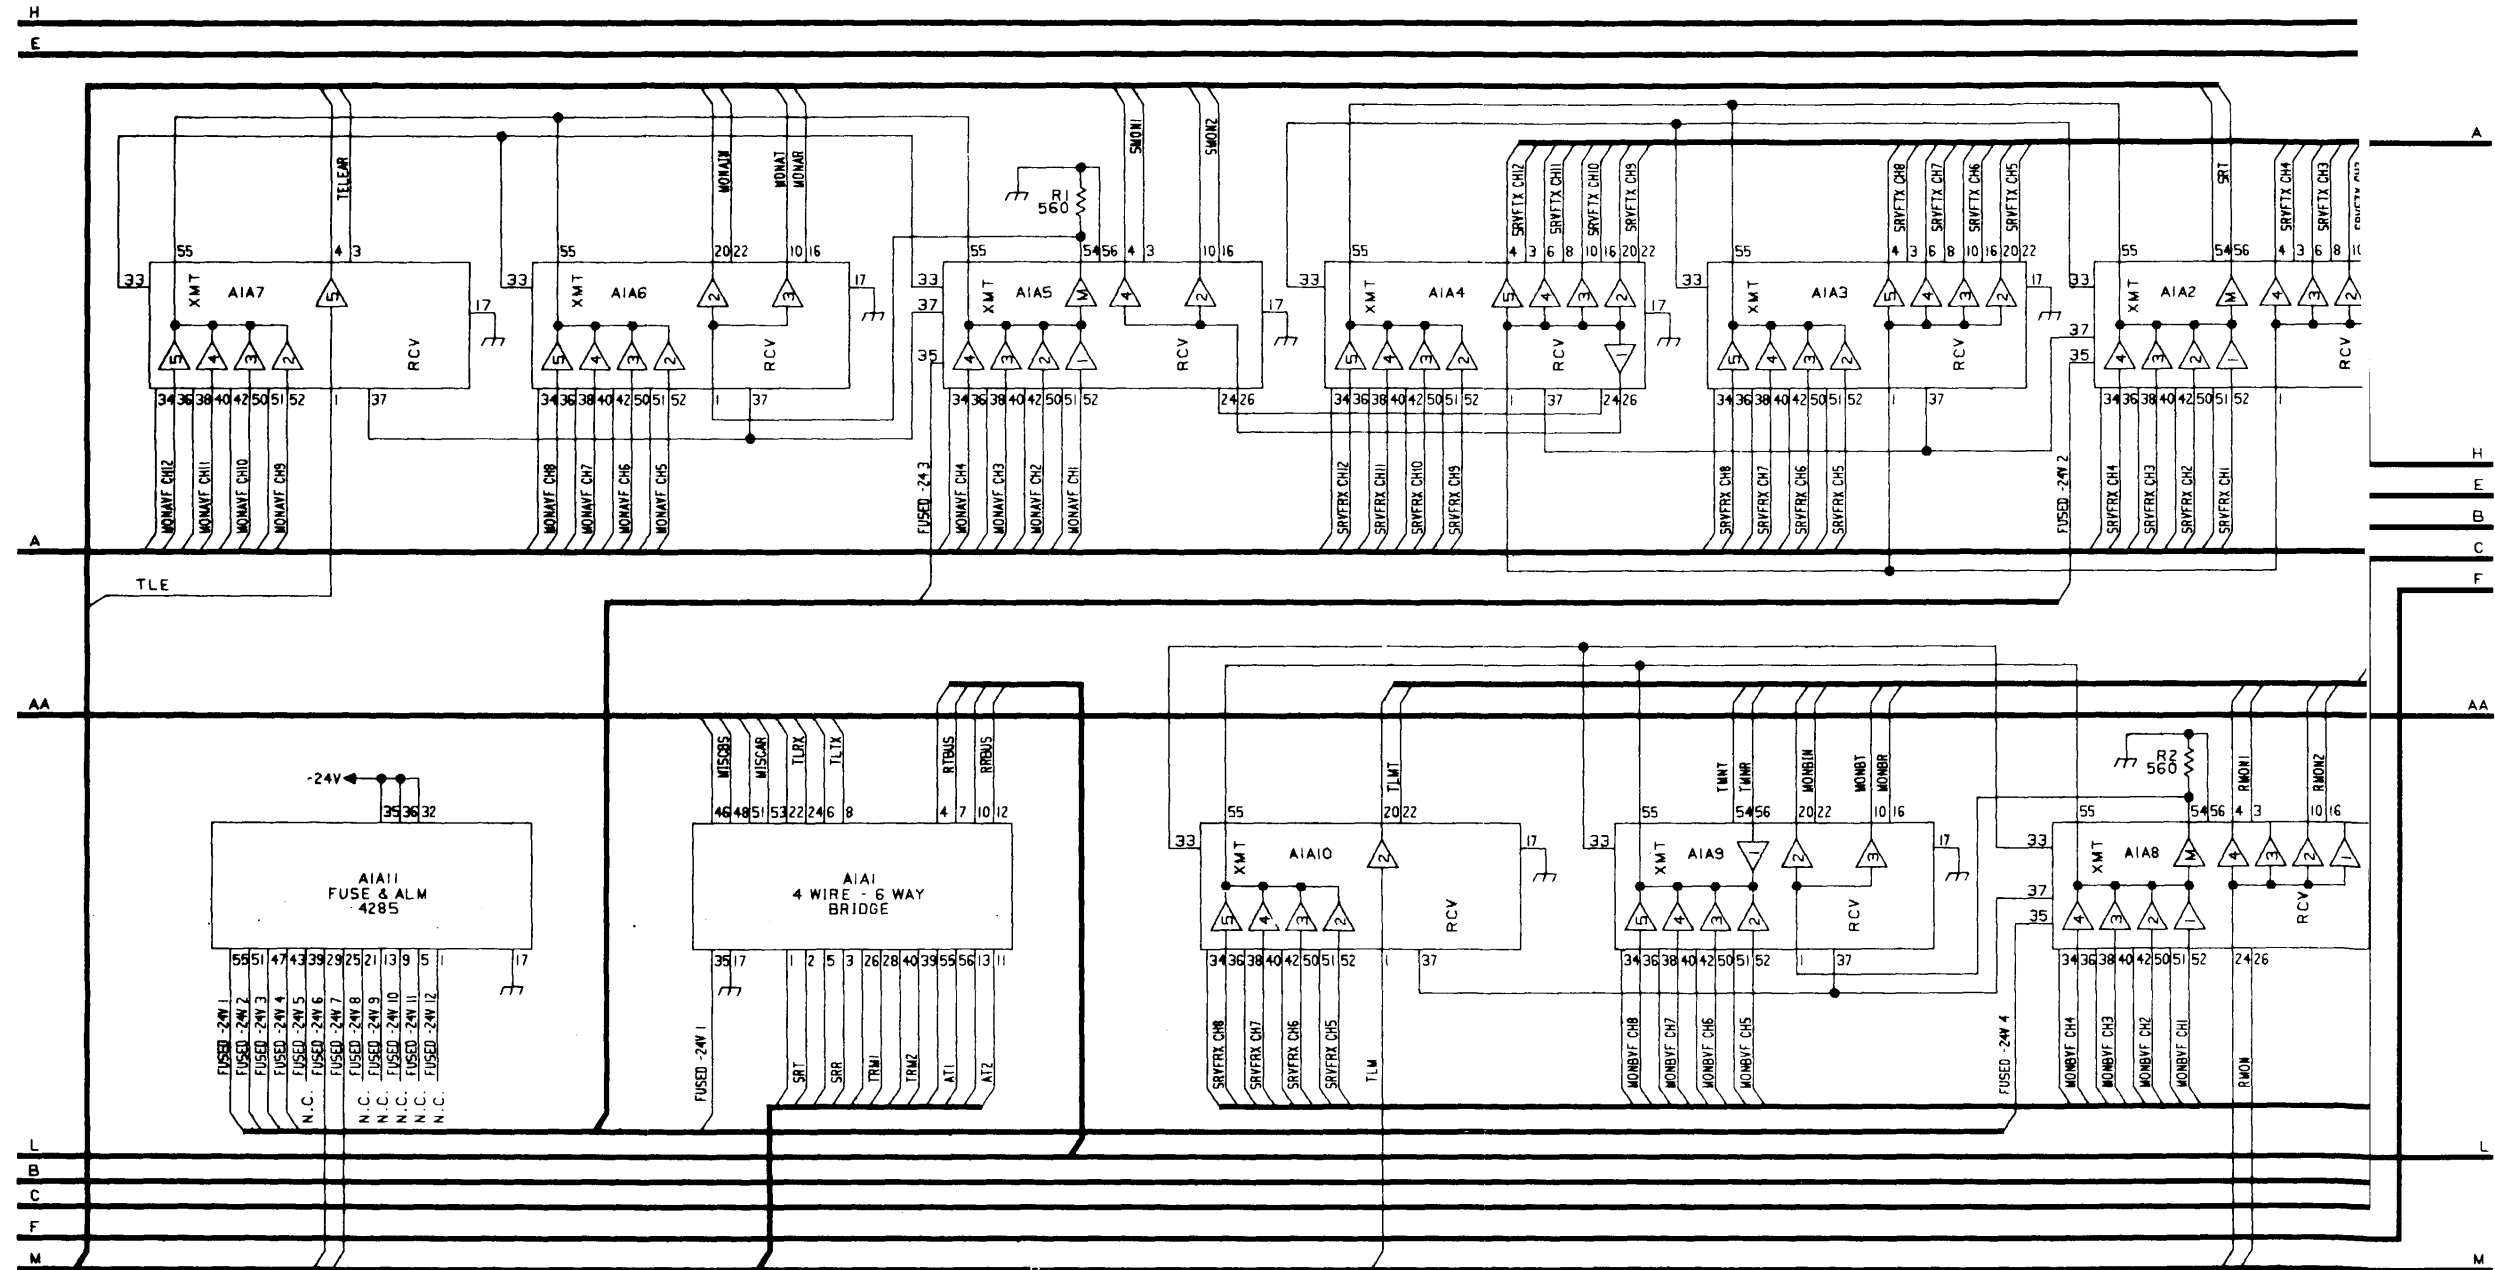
Audio/Keyline Card Cage Assembly A, P/N 7052-1610, 2A3 AND 5A3 Communication Control Console oj-512/FRC-176 (V), Schematic Diagram (Sheet 3 of 7)
